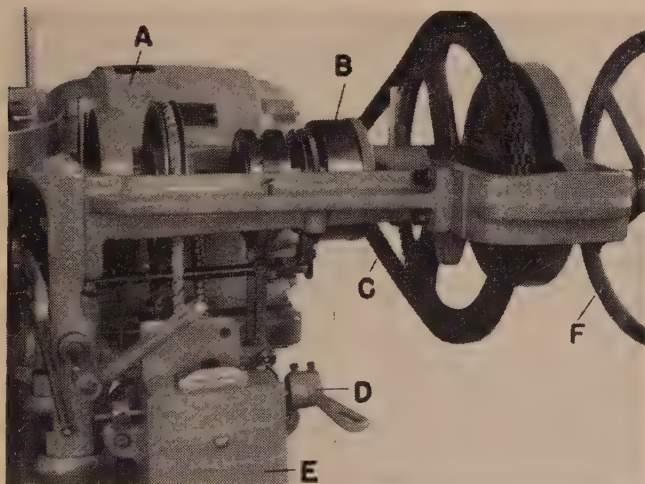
Close-up view of the right side of Brinton circular knitting machine showing construction of individual motor drive, Link-Belt chain, free wheeling mechanism and floating disc clutch.
